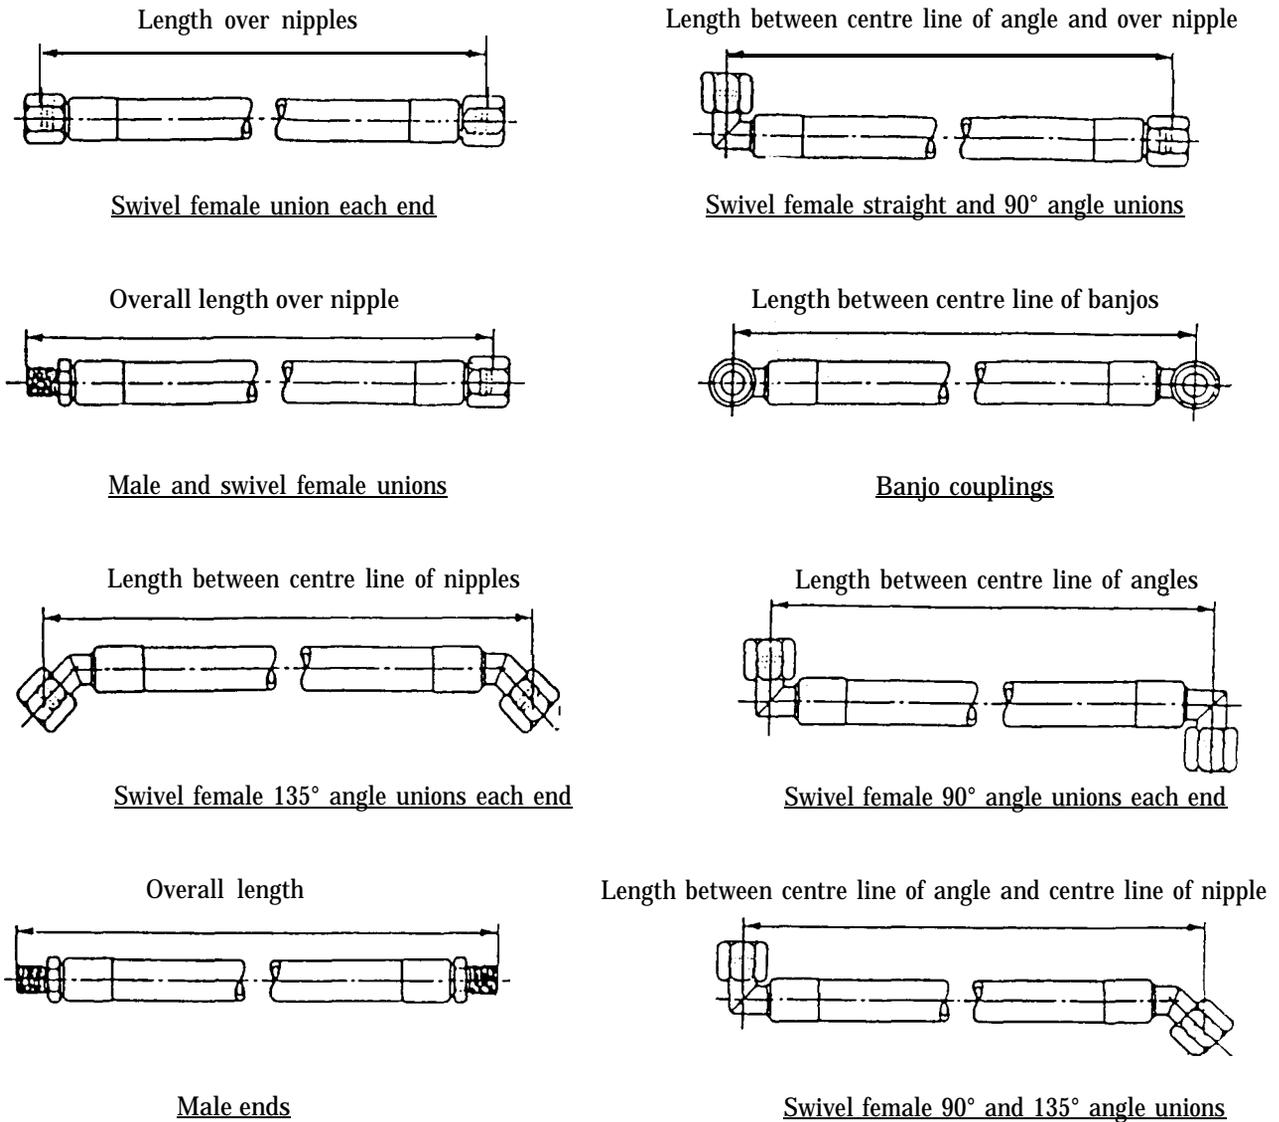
Method of Dimensioning Flexible Hose Assemblies
